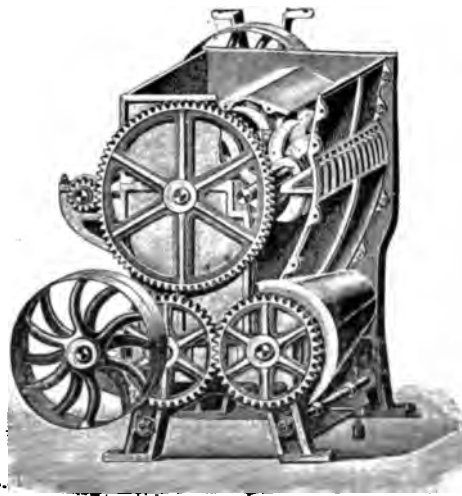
Cone Rolling Machine with Dividing Apparatus above (Jäger).
